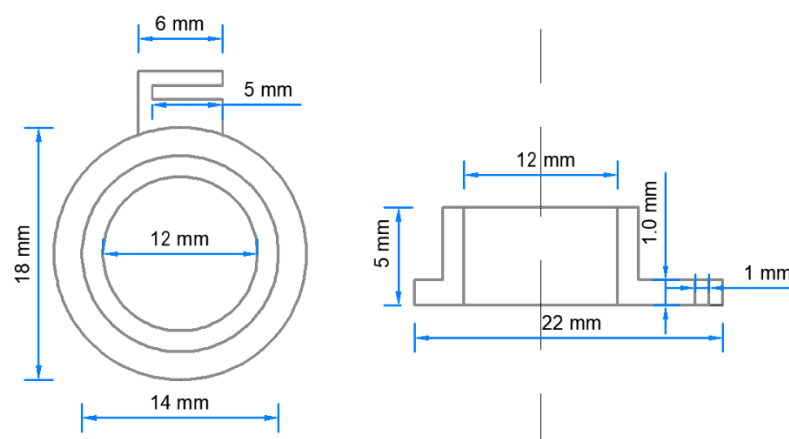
The CAD diagram (left: top view; right: side view) showing the actual design dimensions of the 3D-printed plastic chamber of both NM sensor and MN device.
